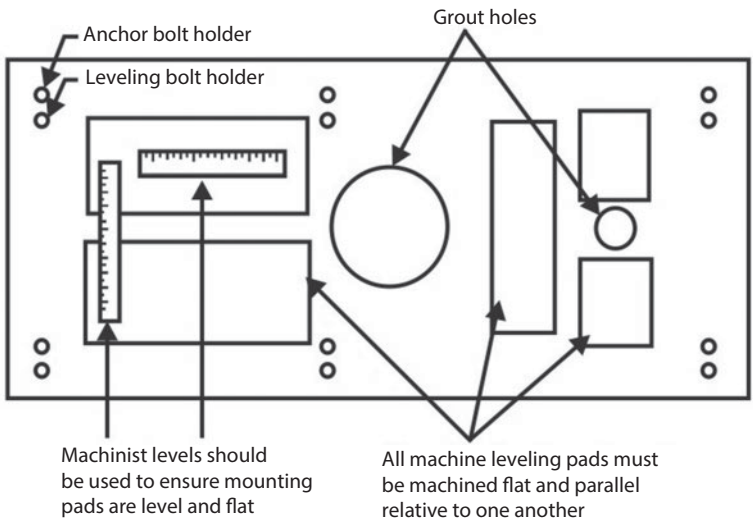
Machinist levels should be used to ensure all baseplate pads are level and flat. Leveling must be done in two directions, lengthwise (with shafts) and crosswise transverse (perpendicular to shafts).
